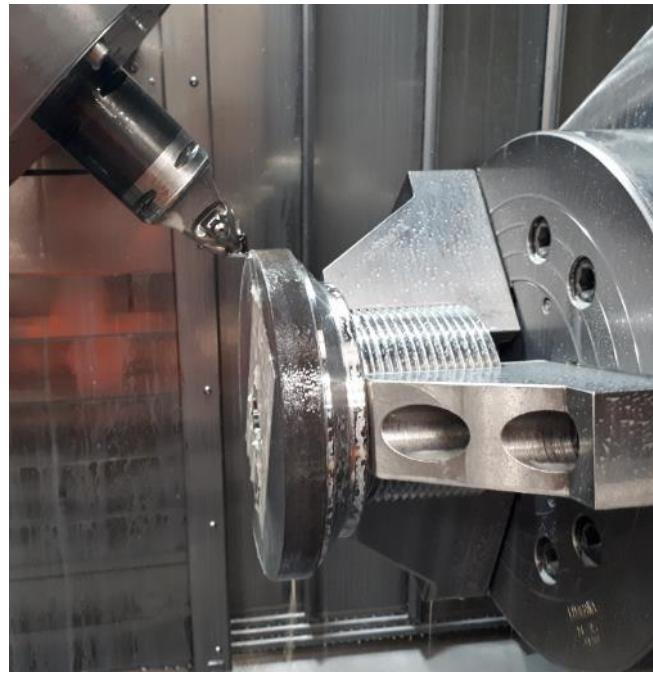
Clamping of the workpiece during the second operation (auxiliary spindle).
